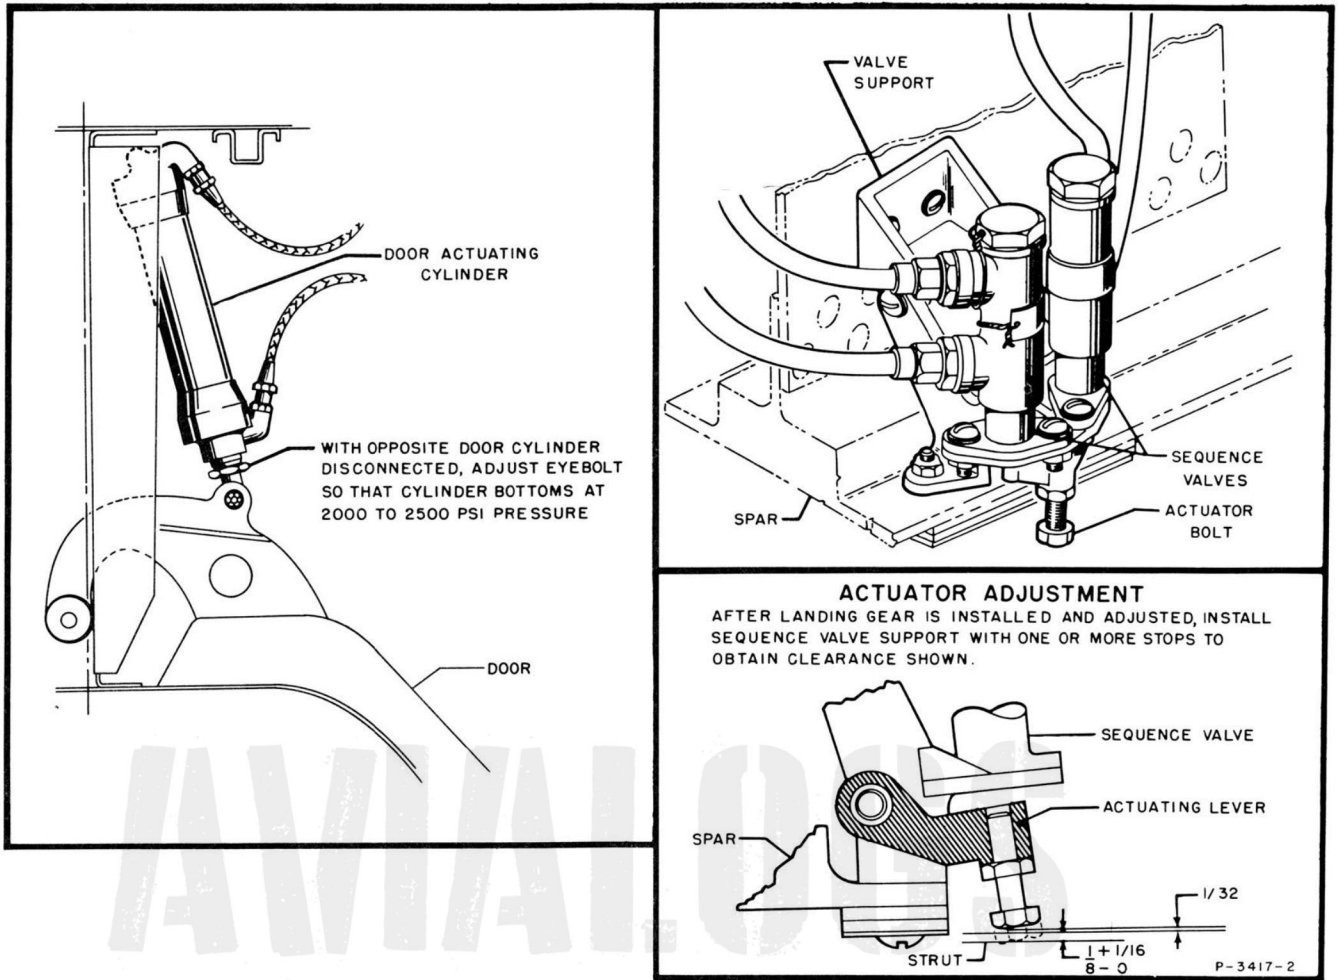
Main Landing Gear Door Installation and Adjustments (Sheet 2)
